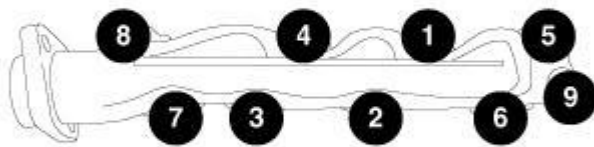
Exhaust Manifold Bolt Tightening Sequence - Right
